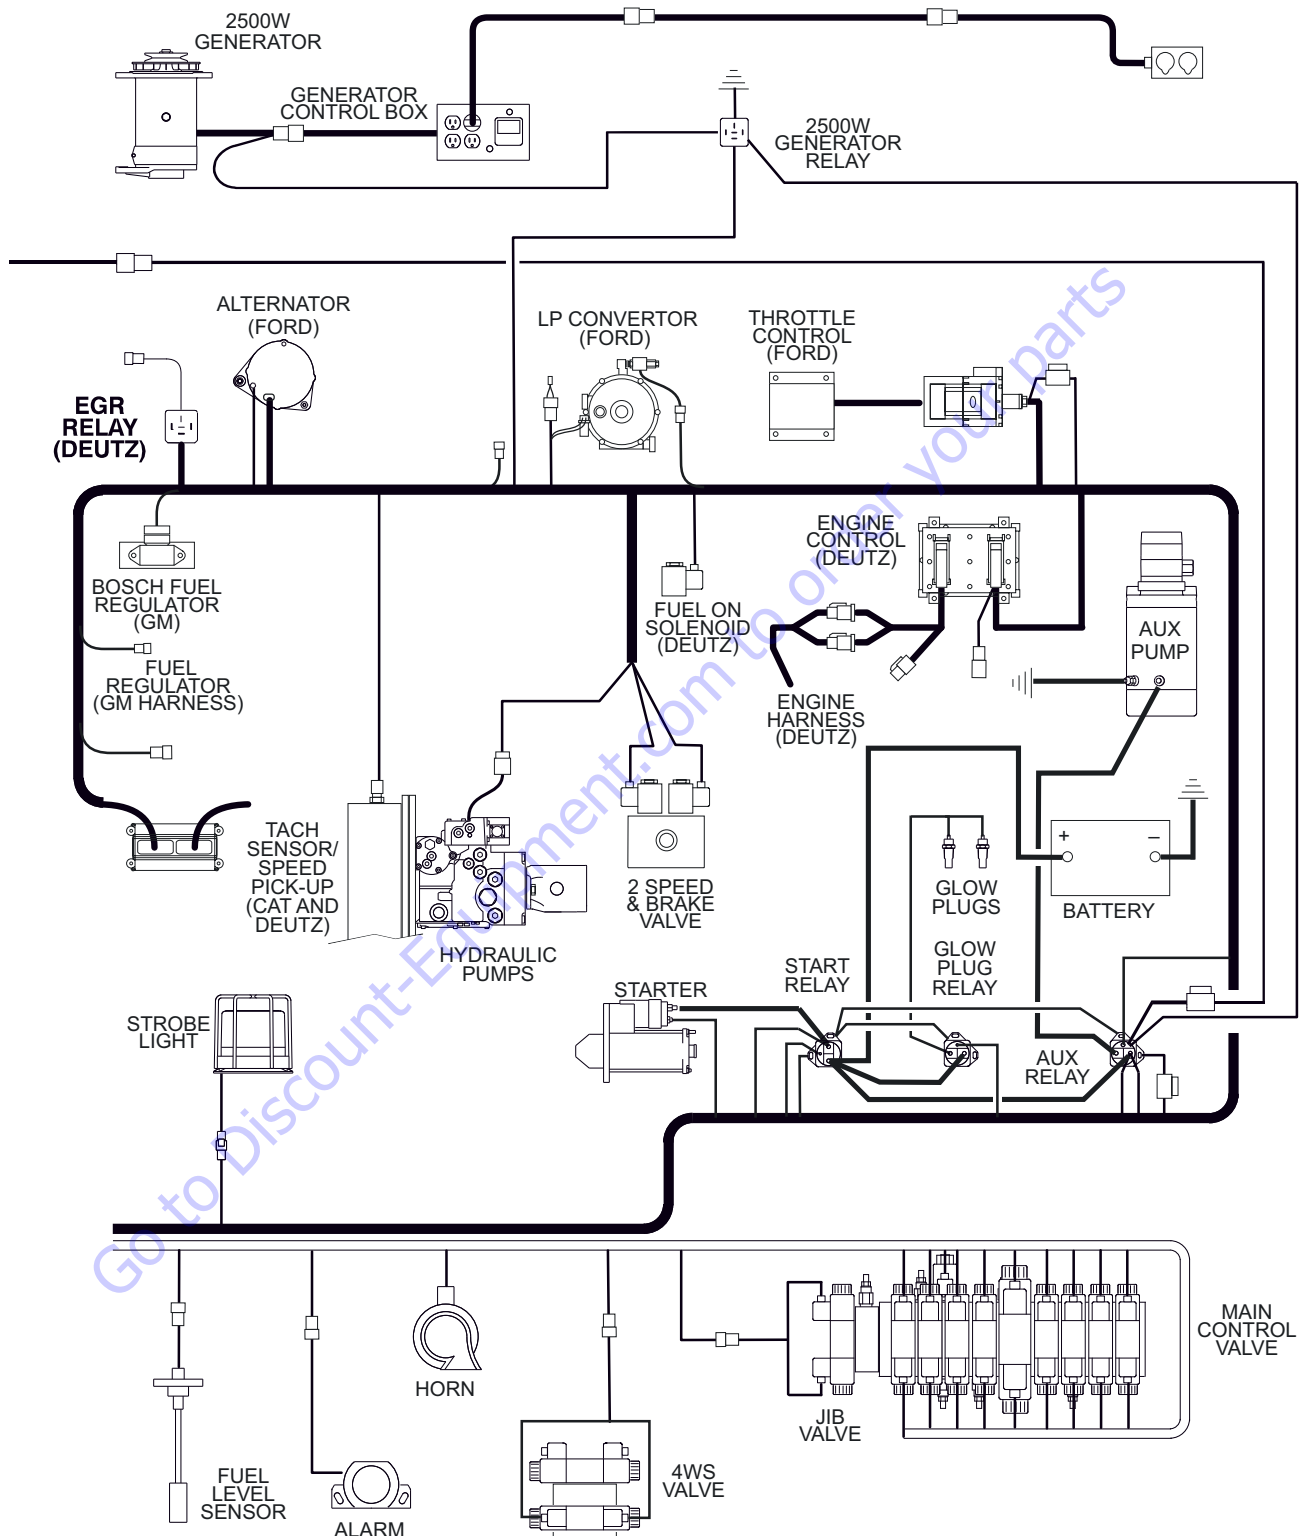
Electrical Components Installation Without UGM (SN 0300135982 through 0300185827) - Sheet 2 of 2
